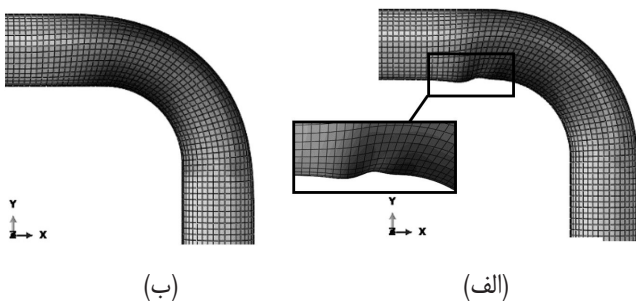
Effect of using wiper die on tube bending, A-without wiper die, B- with wiper die
